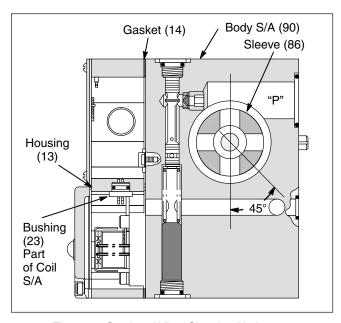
Sectional View Showing Hydrostat Sleeve Orientation.
